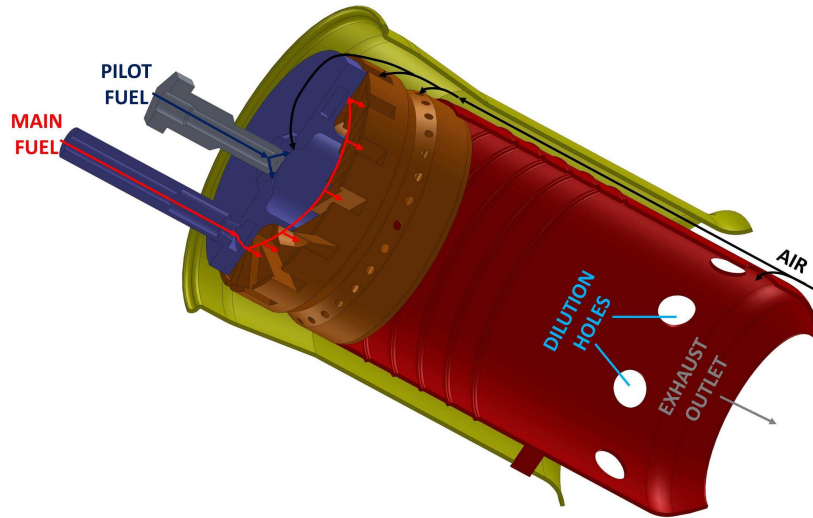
Section view of the CAD model for the Turbec T-100 combustor.
